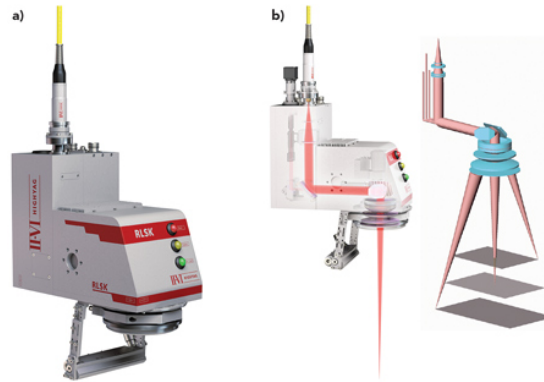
Scanner-based remote laser welding head (a), with its sectional view and functional principle (b)[5]
